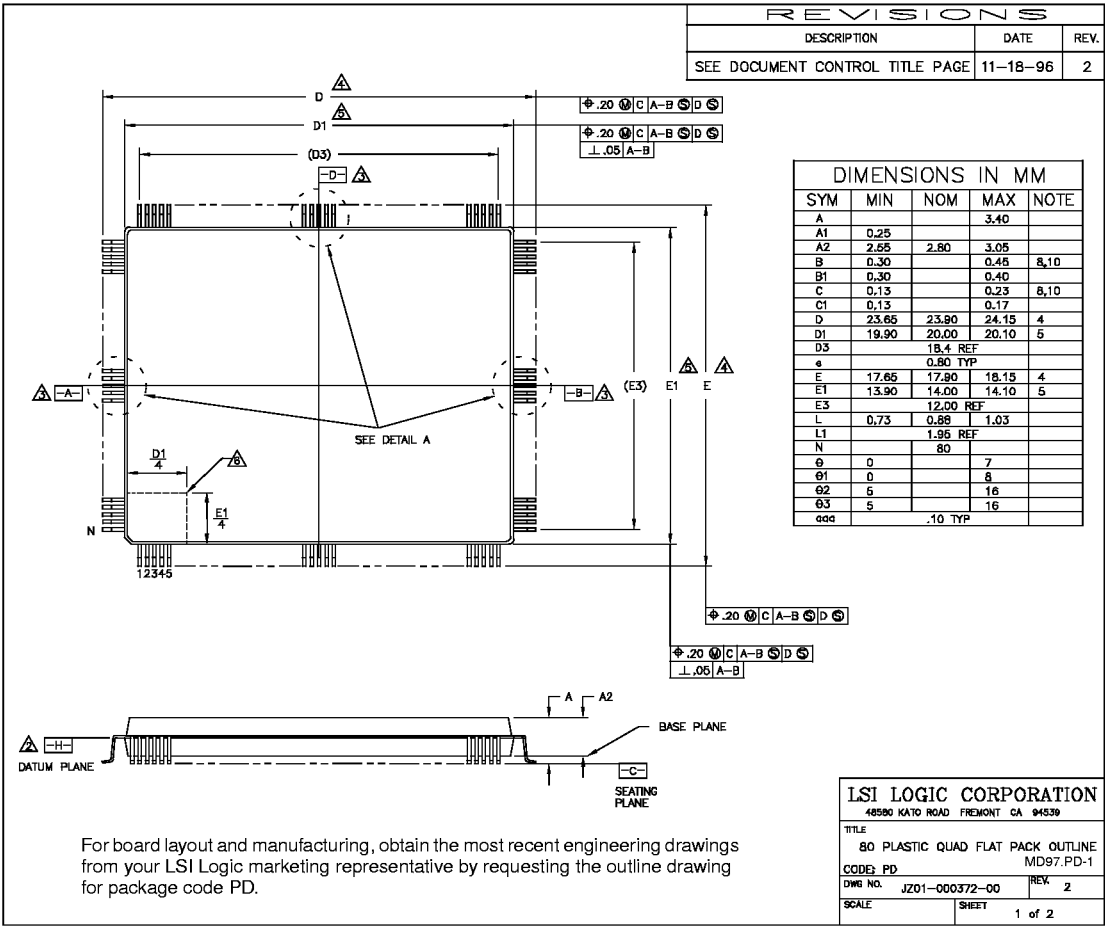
(Cont.) 80-pin PQFP Package Dimensions
